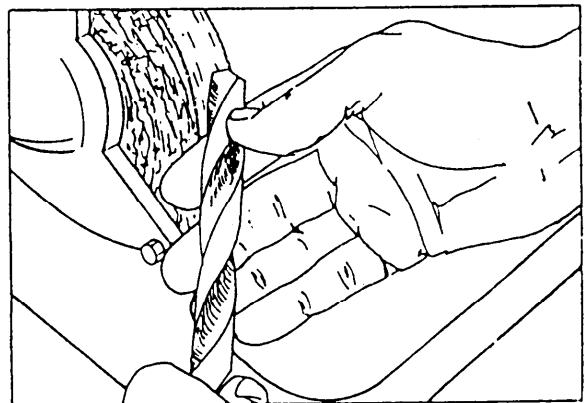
Grinding a twist drill with a grinder (final position).
